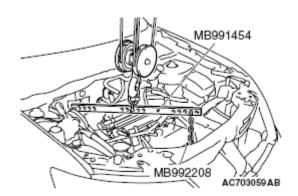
Mounting Special Tool MB991454 To Engine Right Hanger And Special Tool MB992208 (Left Bank)
